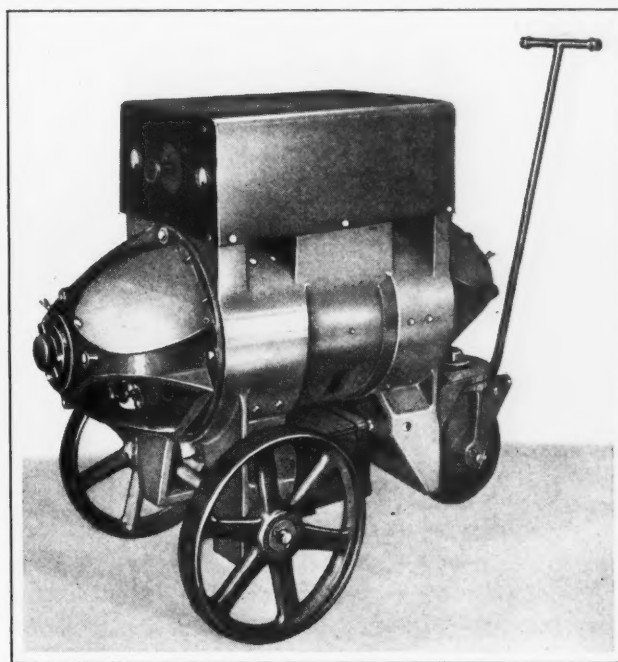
Westinghouse Heavy-duty 300-ampere Arc Welder
